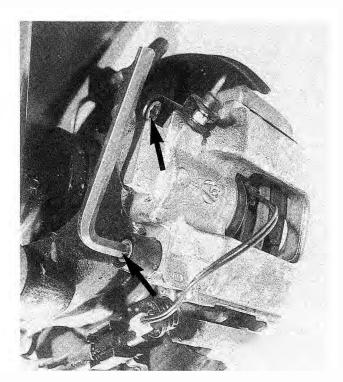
Upper and lower caliper guide bolts (arrows) being removed.
